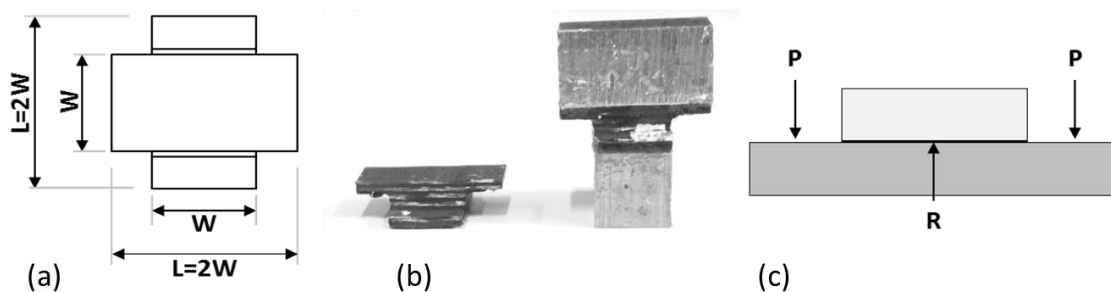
(a) Drawing showing characteristic dimensions of the tensile coupons; (b) steel sections were adhesively bonded to the upper and lower surfaces of the machined coupons to prevent bending; (c) schematic showing loading configuration.
